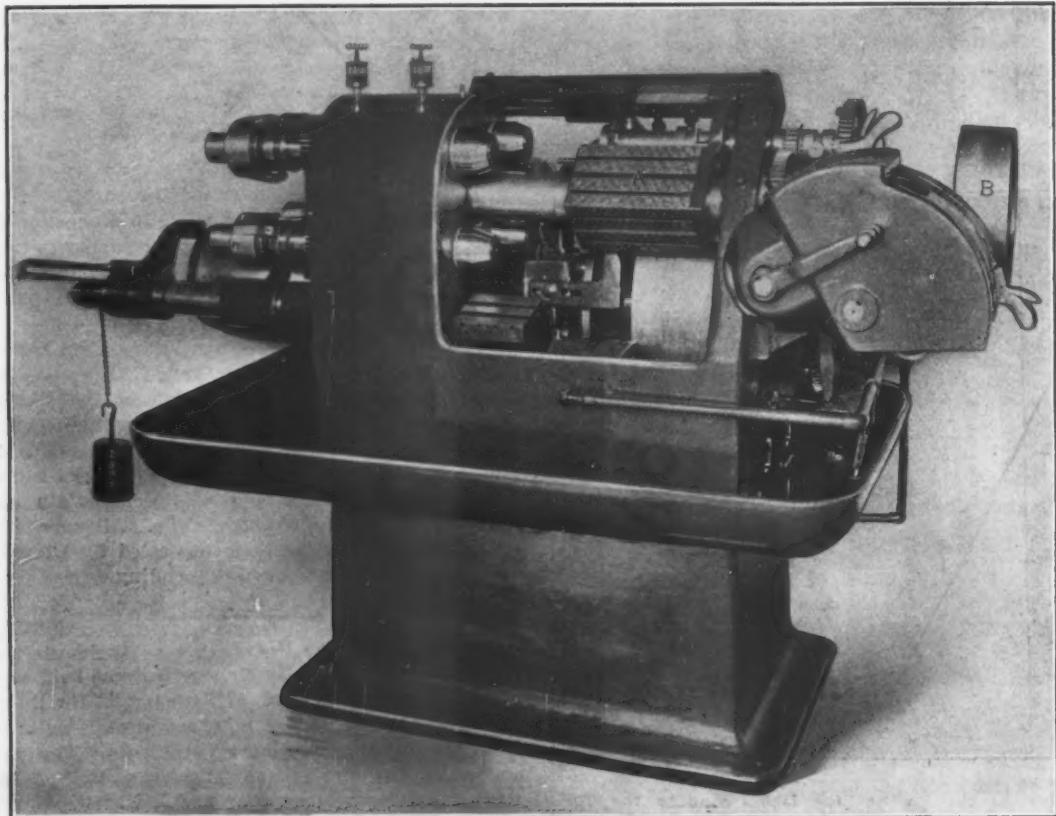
The New Gridley Automatic Multiple Spindle Turret Lathe Built by the Windsor Machine Company, Windsor, Vt.
